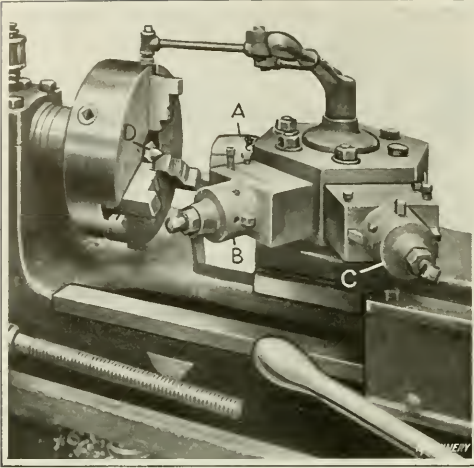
Turret Lathes on which the Open End of the Piston Casting is bored, faced, and chamfered, and the Boss is centered
